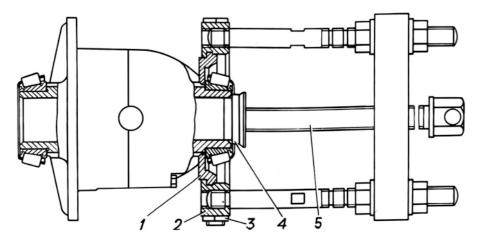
Removing the bearing inner race from the differential compensating case: 1 – insert; 2 – support; 3 – nut; 4 – thrust block; 5 – puller screw
